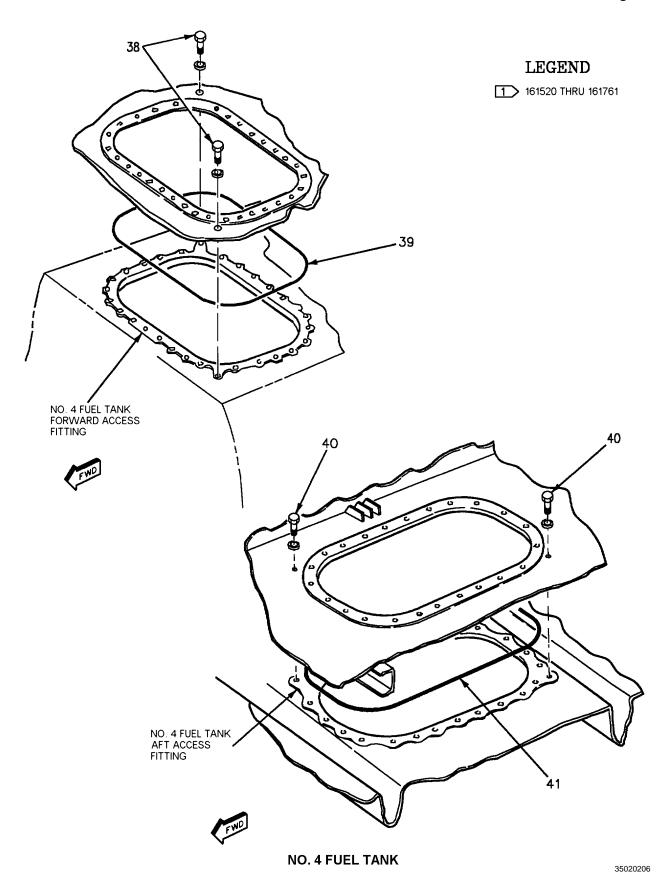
Fuel Tank Access Fittings (Sheet 6)
